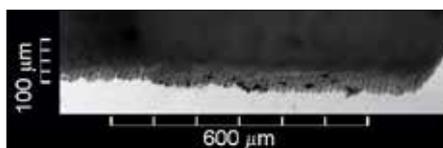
Nanosecond laser machining showing no cracking existing in the bulk
